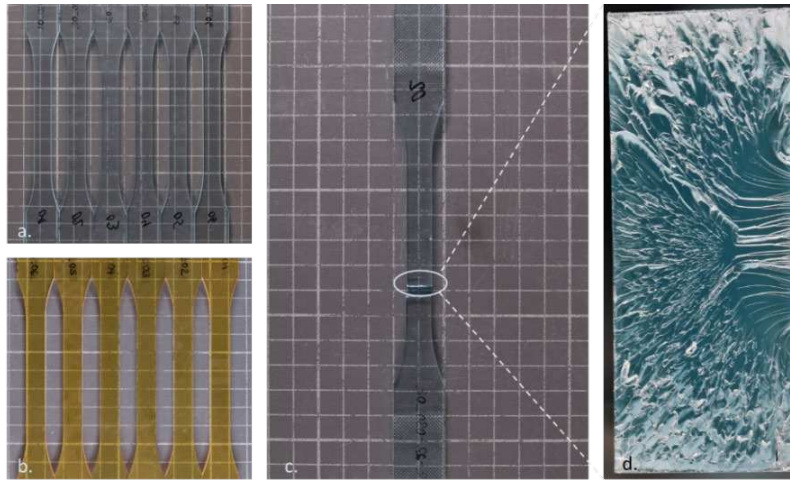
a., b. Specimen geometry, c. typical macroscopic damage and d. damaged surface
